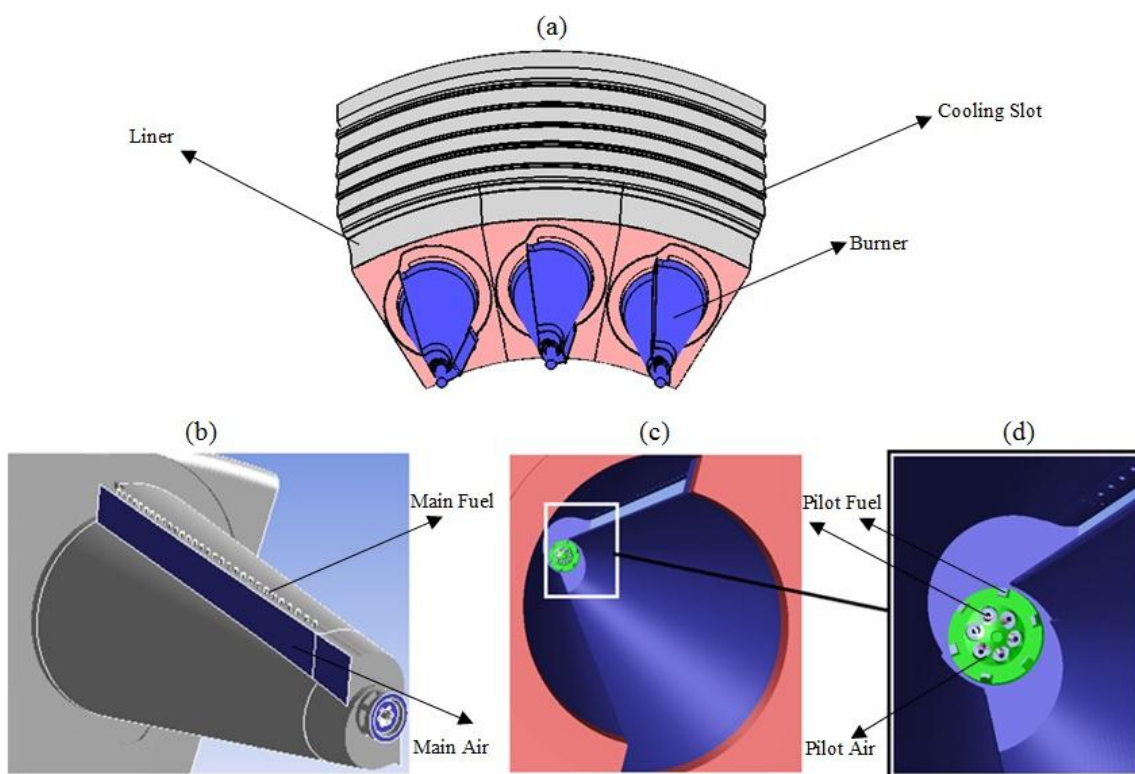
Schematic view (a) the combustion chamber, (b) EV burner, (c) inside view of the burner, (d) pilot part of the burner
